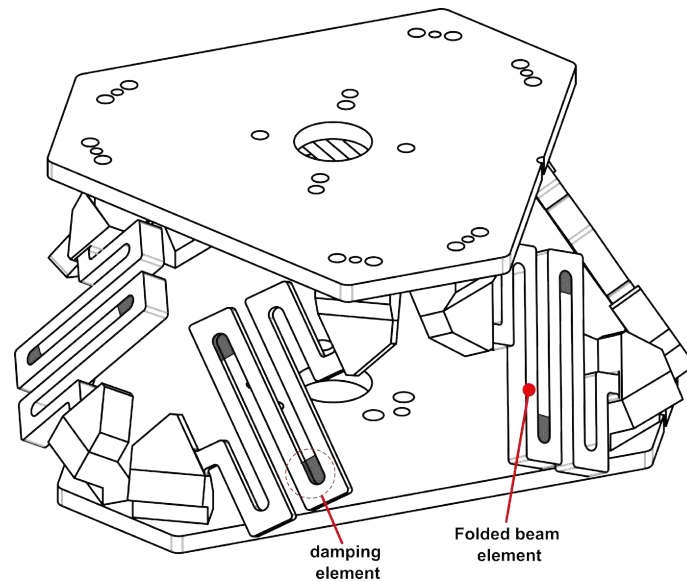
Stewart-based folded beam isolator - where the folded beams were equipped with the damping elements.
